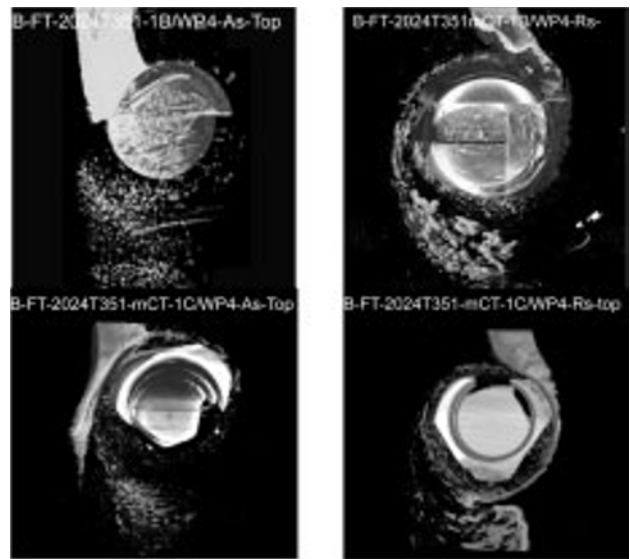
Images produced from the μ CT scans; (left) top view and (right) side view of friction stir welded AA2024-T351 embedded with Ti powder marker material for top half and in the advancing side of the weld
